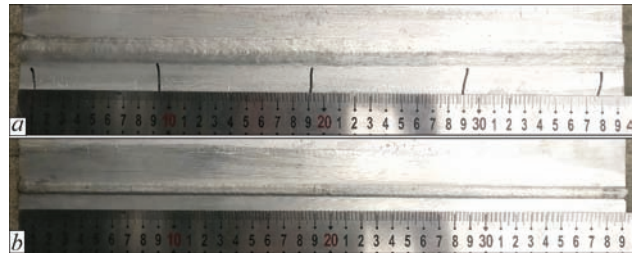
Butt joint of 5083 alloy ($\delta = 8$ mm), produced by hybrid Plasma-MIG welding in the robotic complex: *a* — upper bead; *b* — lower bead
